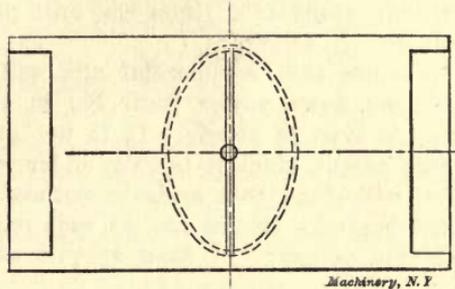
Development of Cap, showing Oil Grooving and Counterboring
